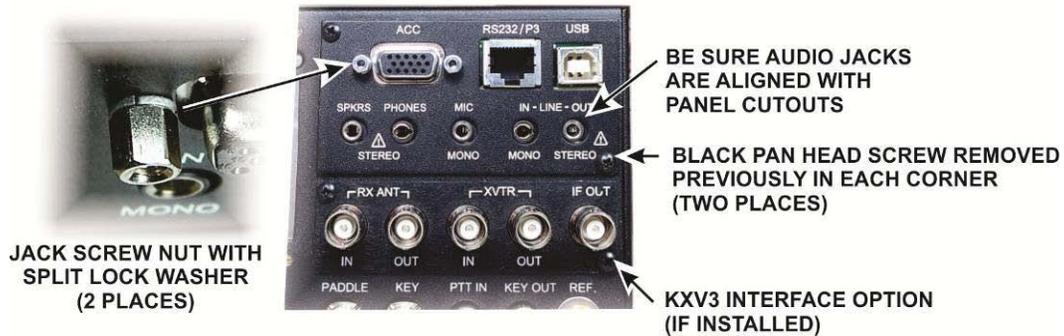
Mounting the new KIO3B Rear Panel Cover.
